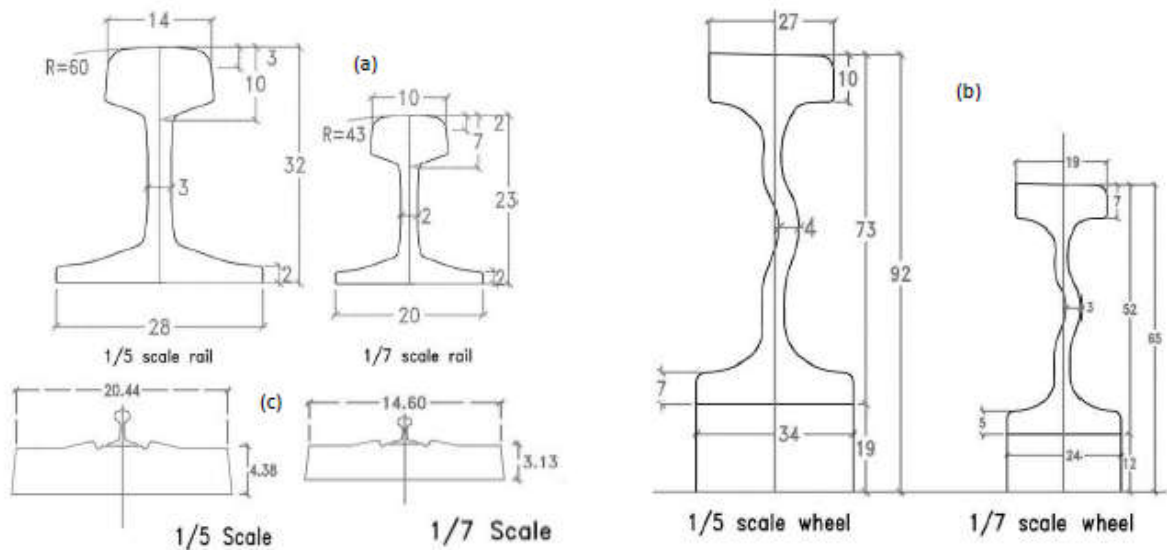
The Geometry of components in 1/5 and 1/7 scaled test rig, all dimensions in mm, (a) rails, (b) wheels, (c) sleepers
